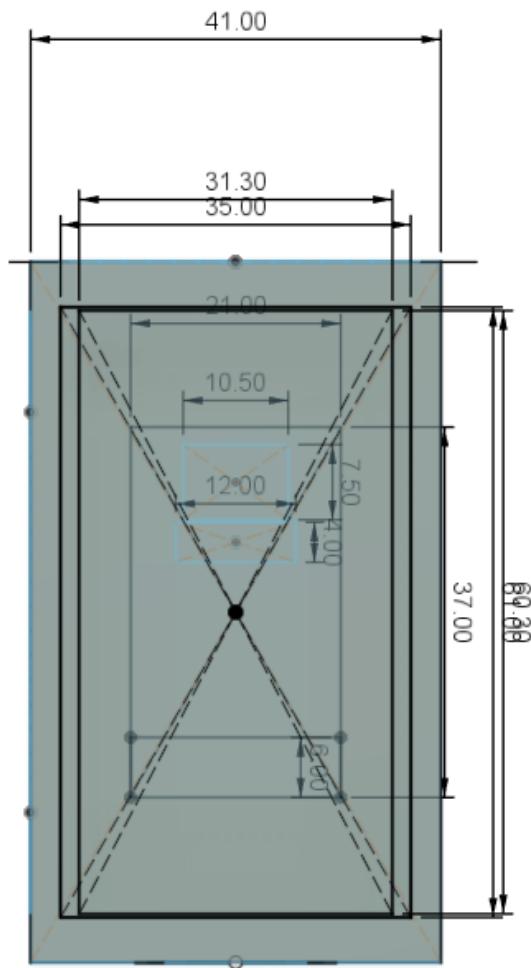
8 FRONT VIEW OF LASER MODULE HOLDER BRACKET
